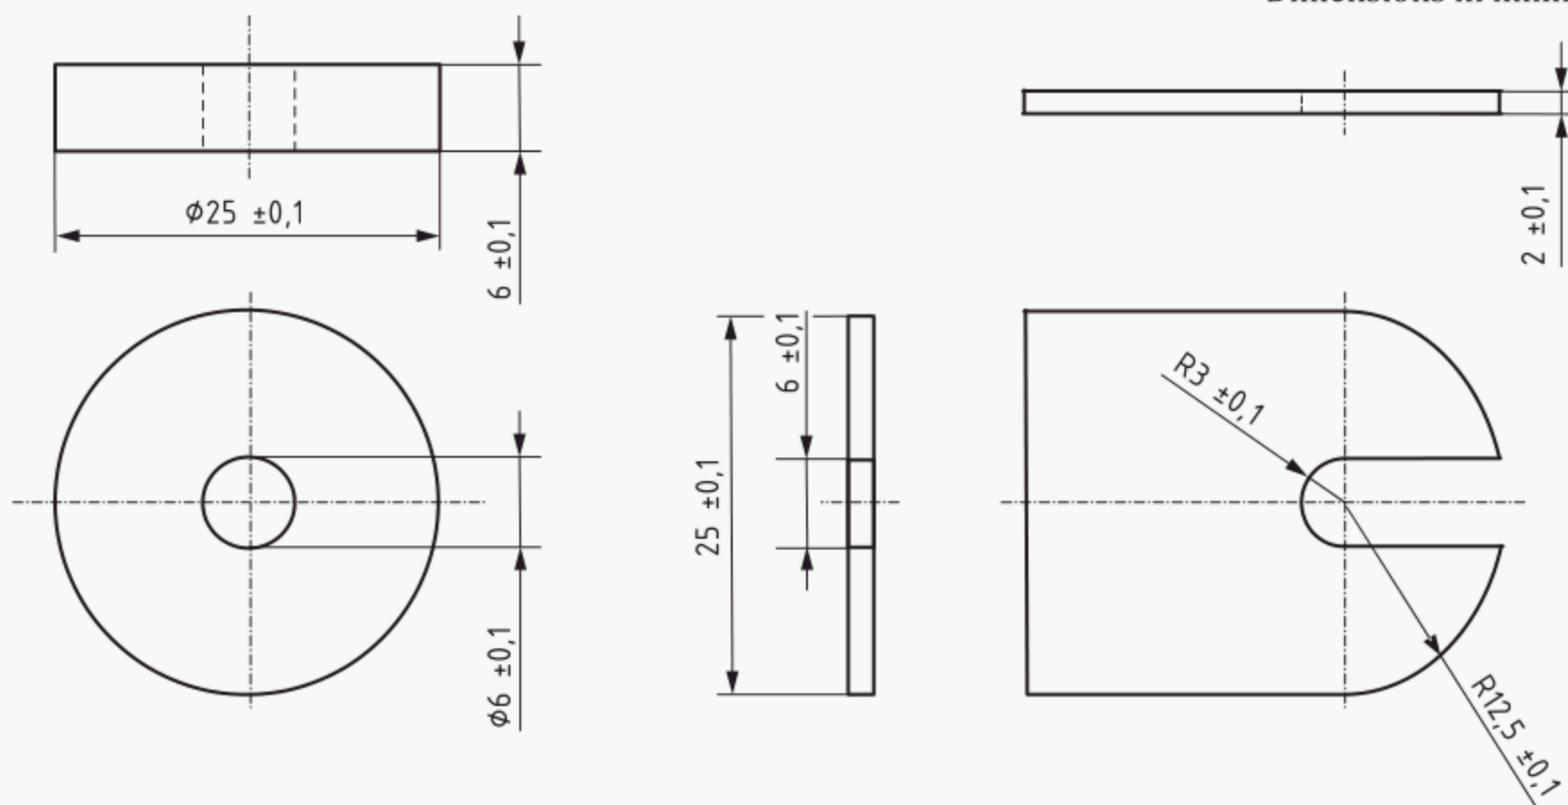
Spacer No. 1 (left) and spacer No. 2 (right)
